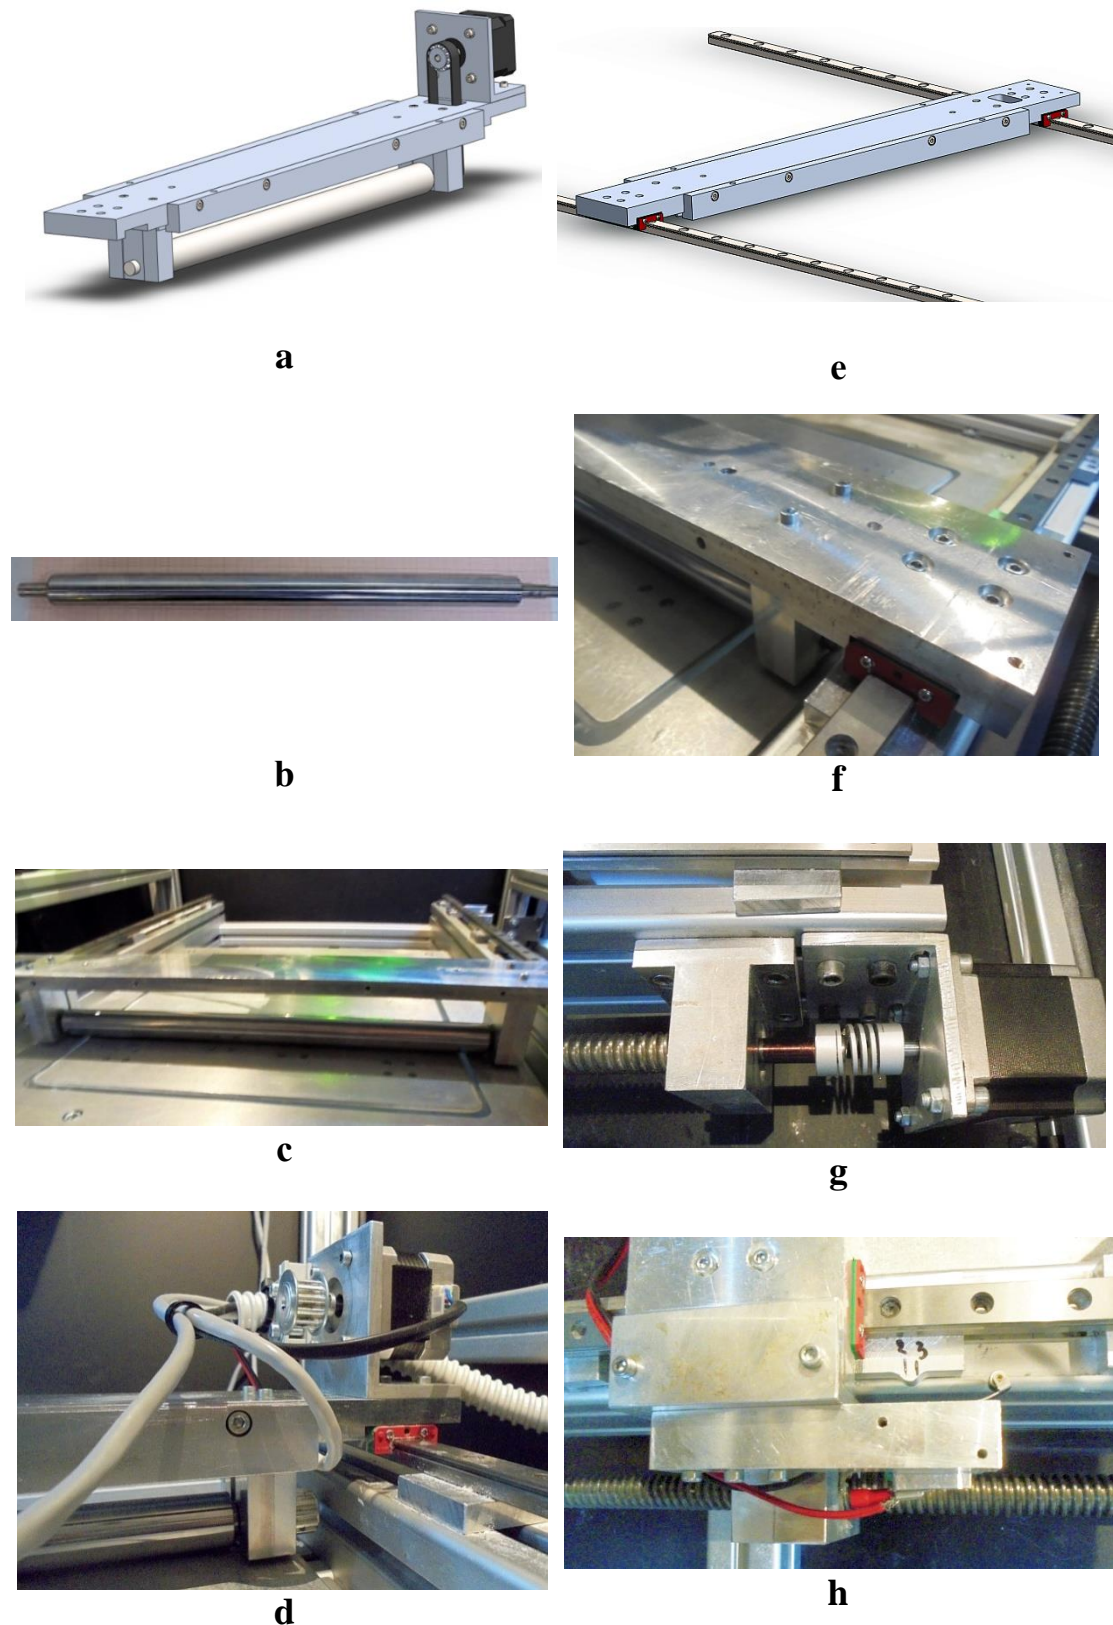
Left column: Roller: (a) 3D CAD drawing; (b) Unmounted roller; (c) Mounted roller; (d) Stepper motor; Right column: PRS carriage-linear motion system: (e) 3D CAD drawing; (f) Linear bearing-rail; (g) x-axis stepper motor; (h) Lead screw-nut housing and linear encoder-switch.
